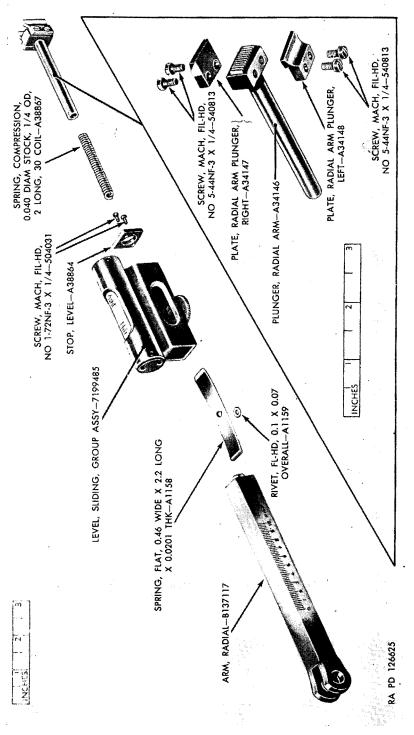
Radial arm and plunger removed from sliding level group assembly 7199485.
